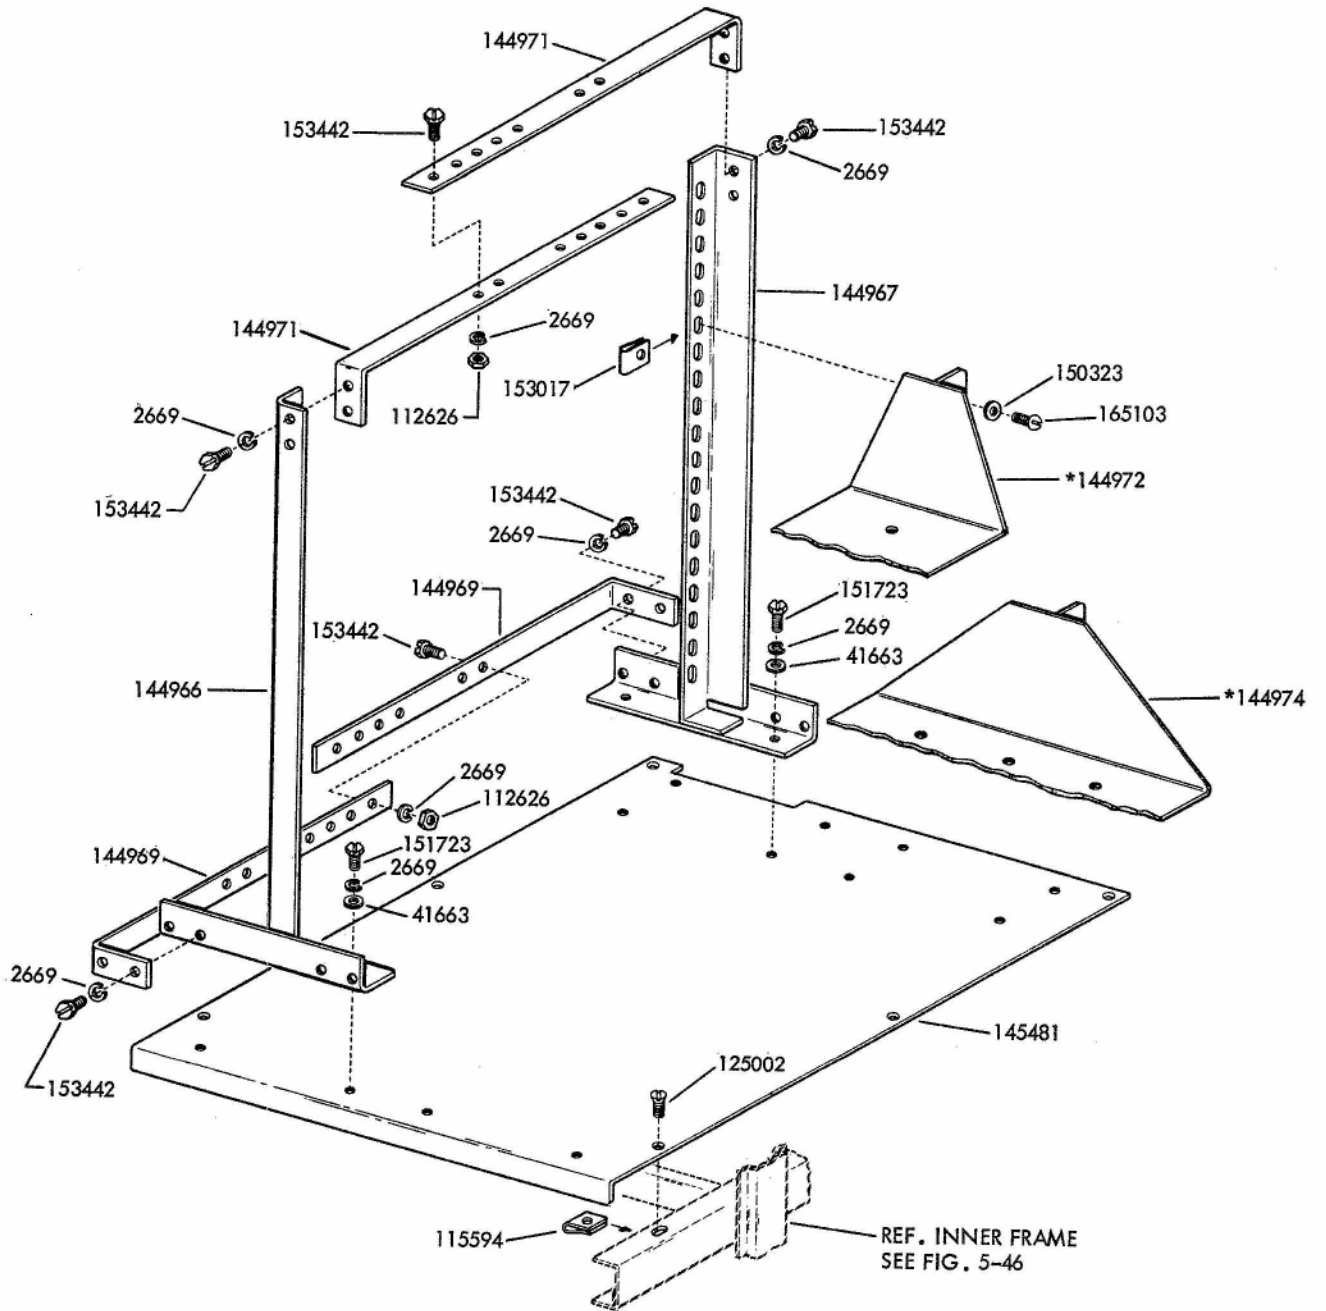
BASE PLATE ASSEMBLY (LBAC227)
